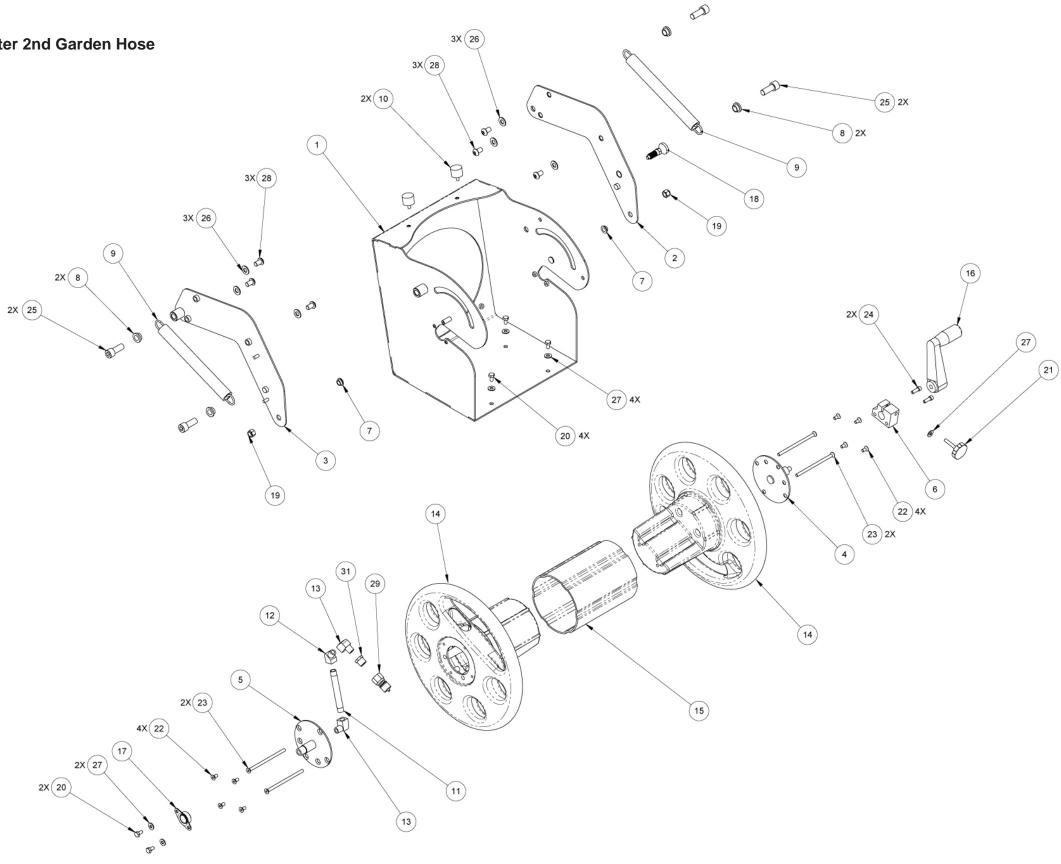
14" (35.6-cm) Diameter 2nd Garden Hose Reel Assembly - Parts View 7586 Rev. A
